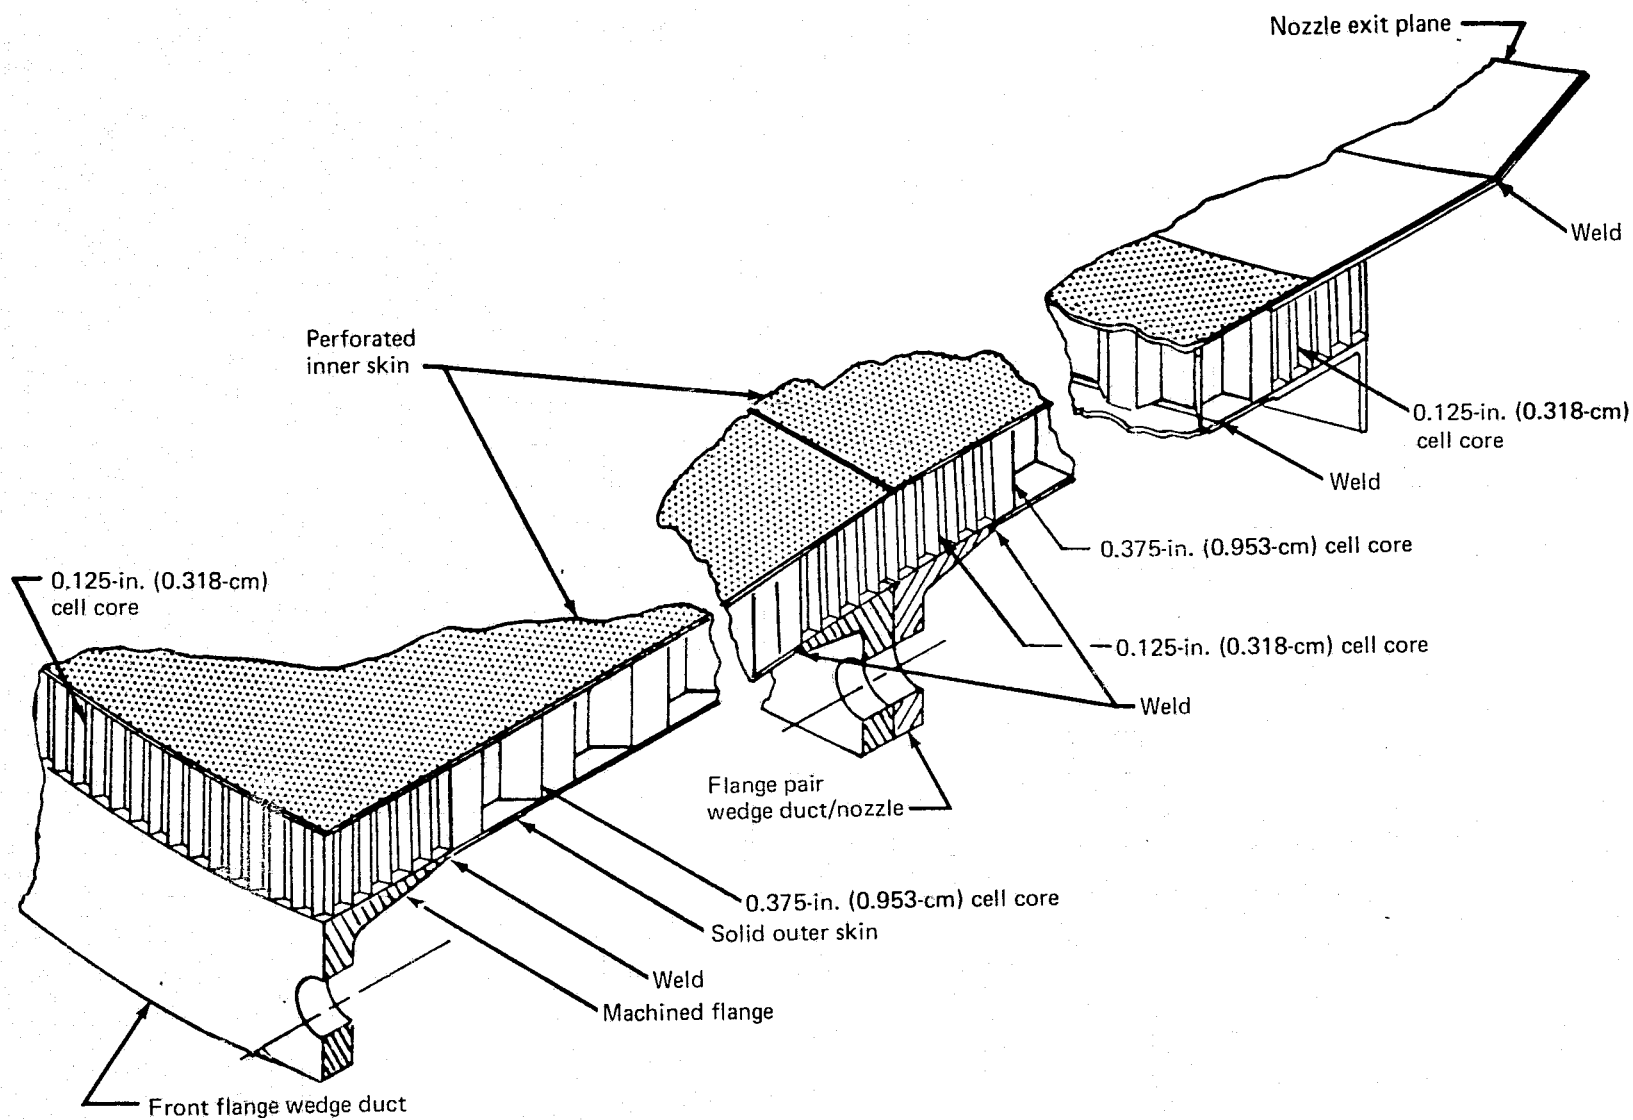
JT8D Refan Alternate Design Exhaust Duct—Aluminum-Brazed Titanium Honeycomb Construction With Dense Core Closures
